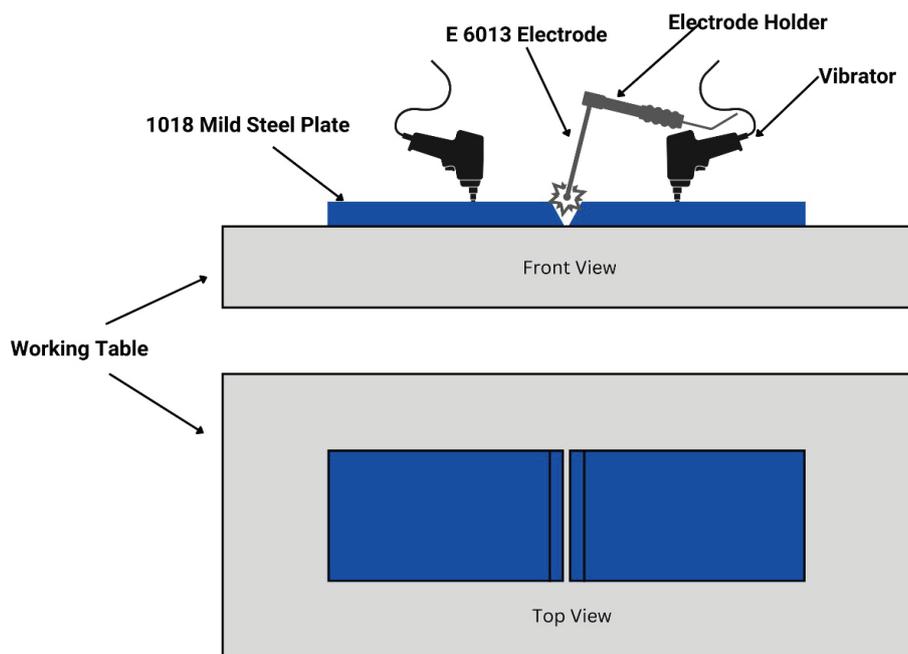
Schematic of vibratory welding experimental setup .
